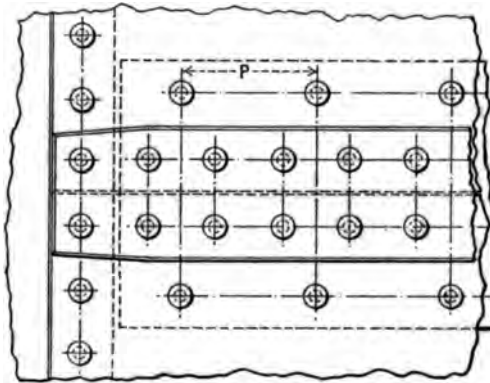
EXAMPLE OF BUTT AND DOUBLE STRAP JOINT, DOUBLE-RIVETED
